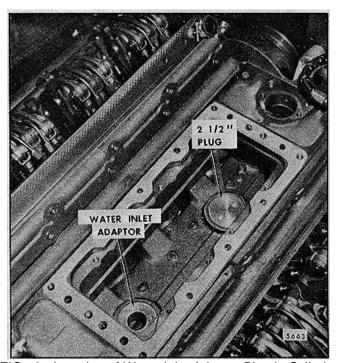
Location of Water Inlet Adaptor Plug in Cylinder Block
